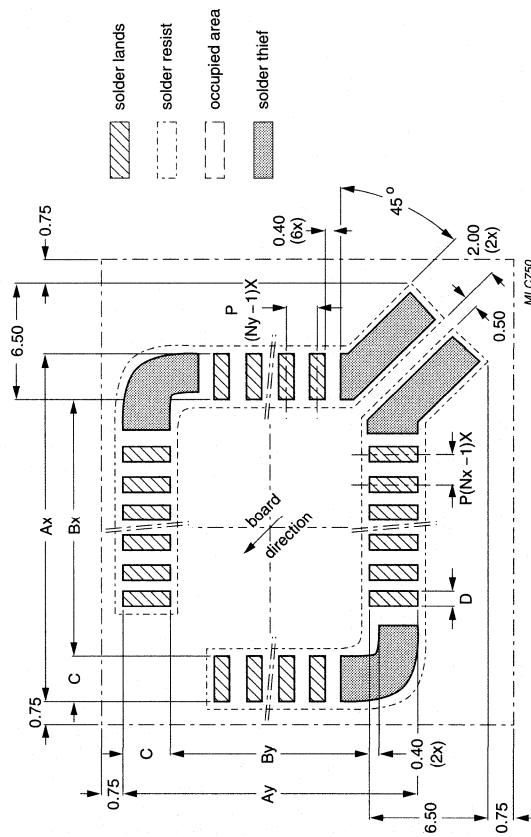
PC board footprint for mounting QFP, SQFP, LQFP & TQFP packages (wave soldering).
